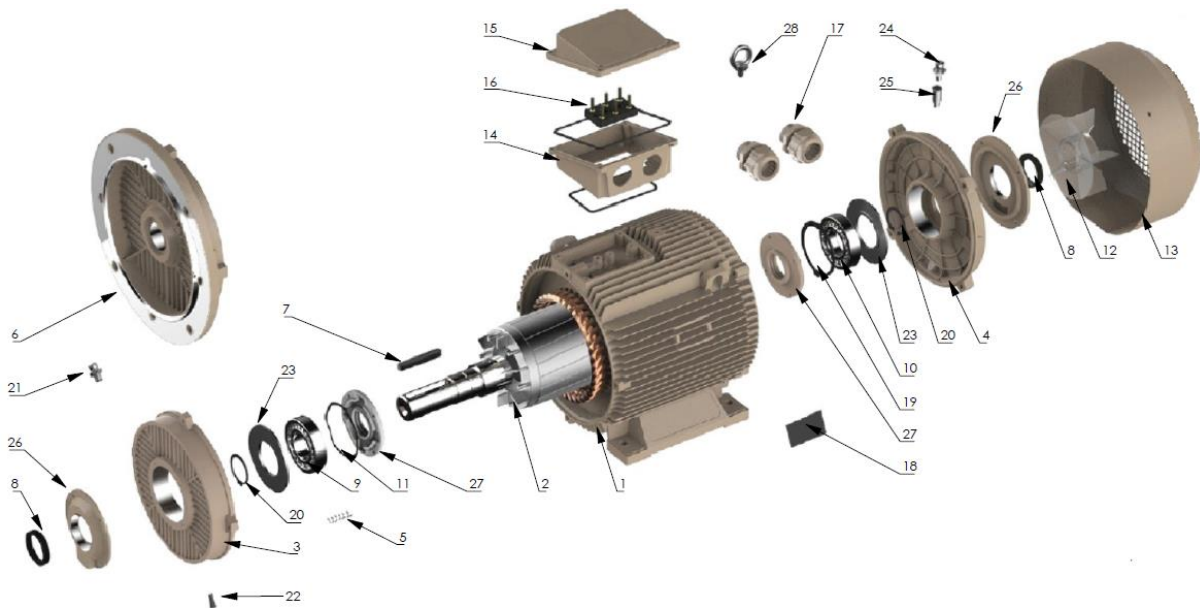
Motor spare parts: ACM – AMY – JM – AWM – YE
